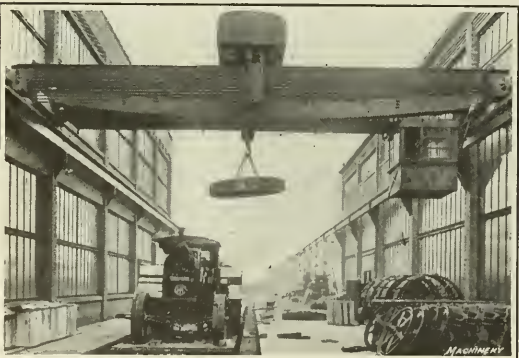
Factories engaged in building heavy machinery, structural iron work, etc., find it necessary to have cranes for loading finished product onto cars. This illustration shows the work of loading a kerosene tractor onto a flat car. The crane was built by the Northern Engineering Works of Detroit, Mich.
